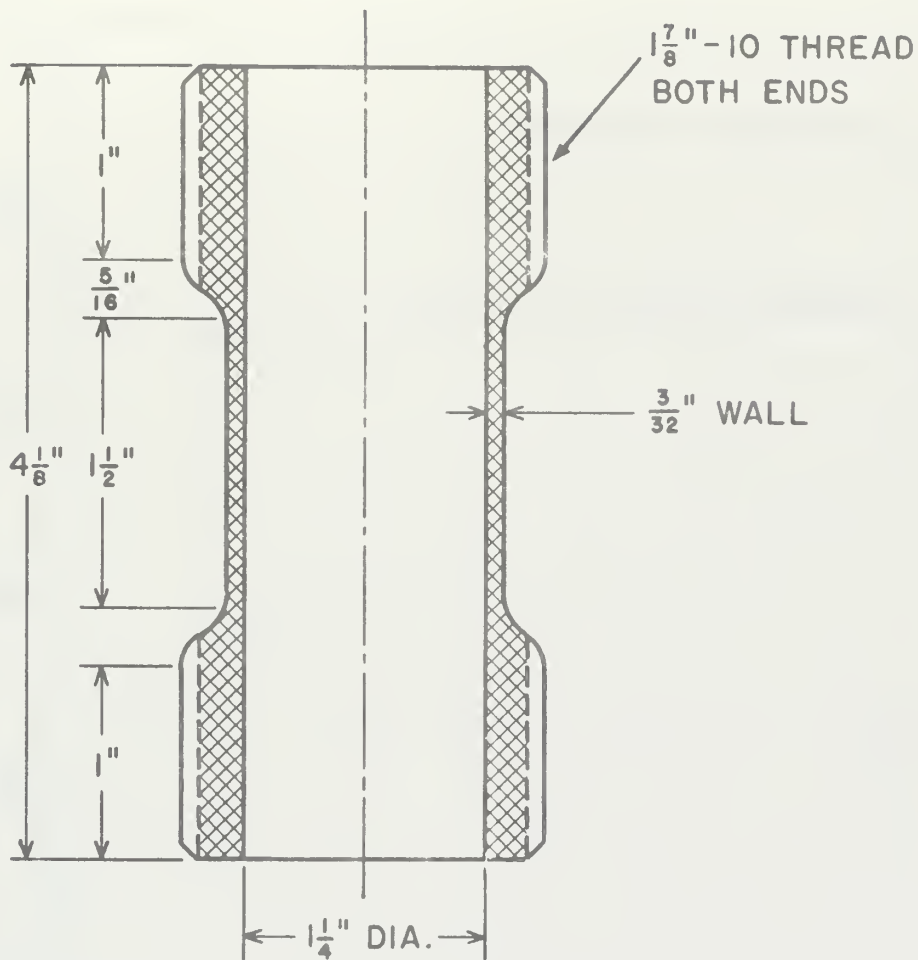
BIAXIAL COMPRESSIVE SPECIMEN.
